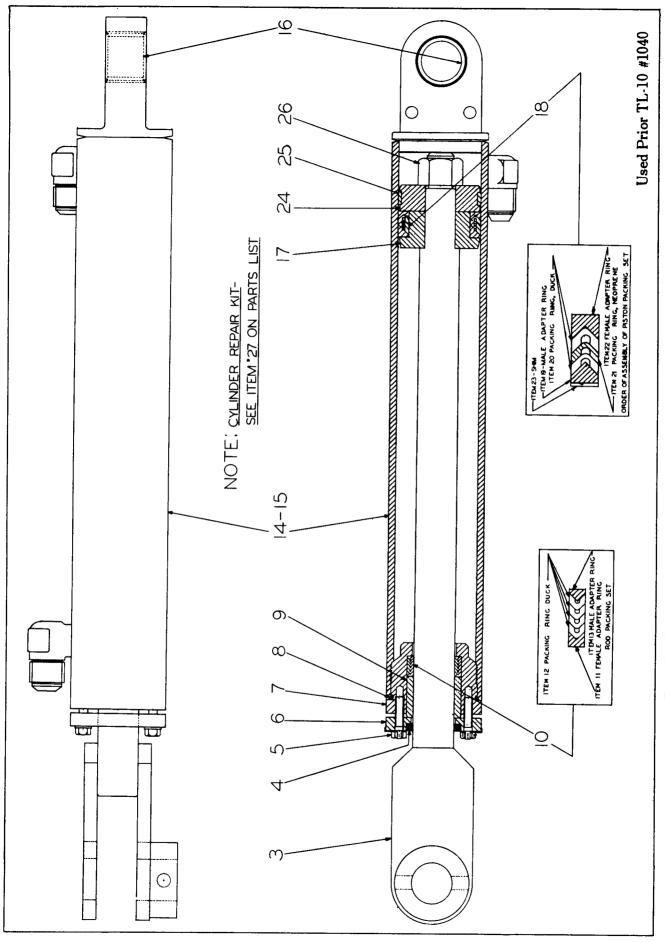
DUMP CYLINDER ASSEMBLY - LEFT AND RIGHT
